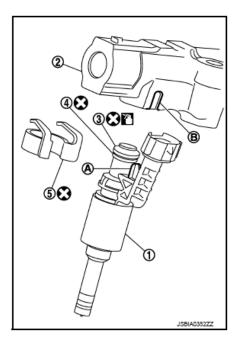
Identifying Fuel Injector, Holder, Fuel Rail, O-Ring And Back Up Rings Courtesy of NISSAN MOTOR CO., U.S.A.
